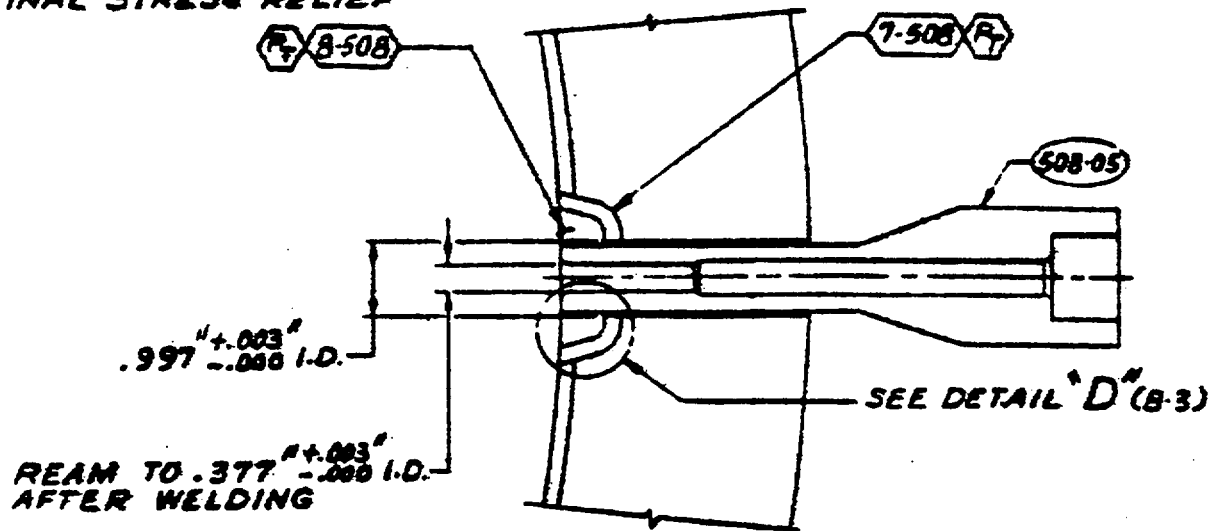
ANO-2 Pressurizer Heater Penetration Inboard Weld Groove
